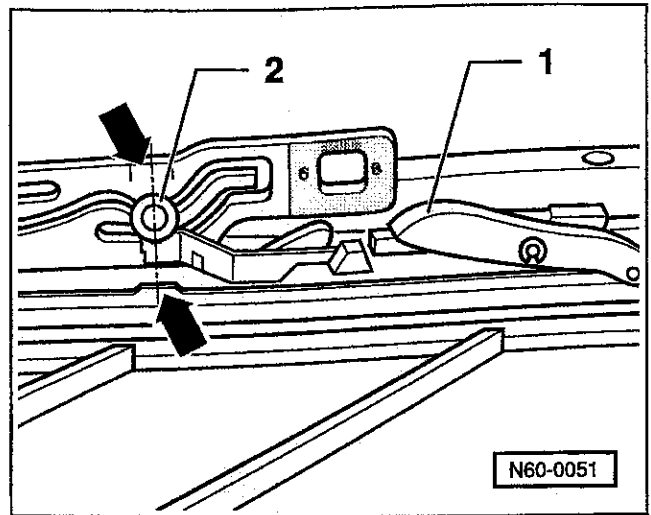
Locating hooks (1) must be in guide rails and pins (2) must be within marks or notches (arrows) for parallel operation.
